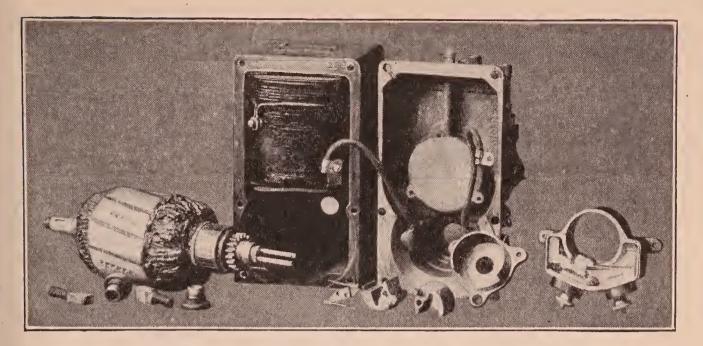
Details Westinghouse Lighting and Ignition Generator
